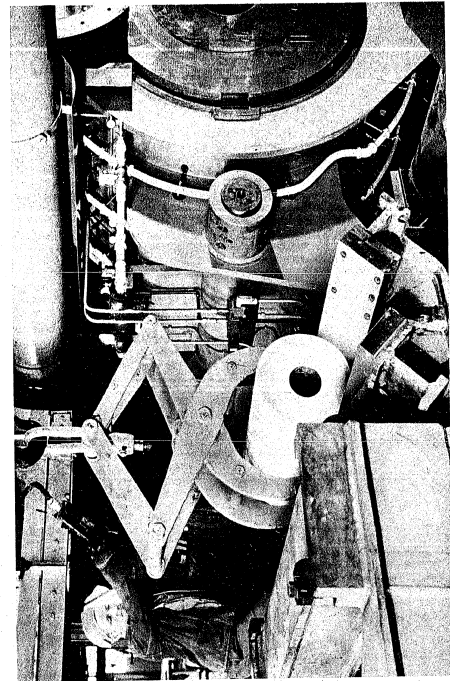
(D) - CLOSE-UP VIEW OF A BILLET BEING TRANSFERRED INTO THE CONTAINER
